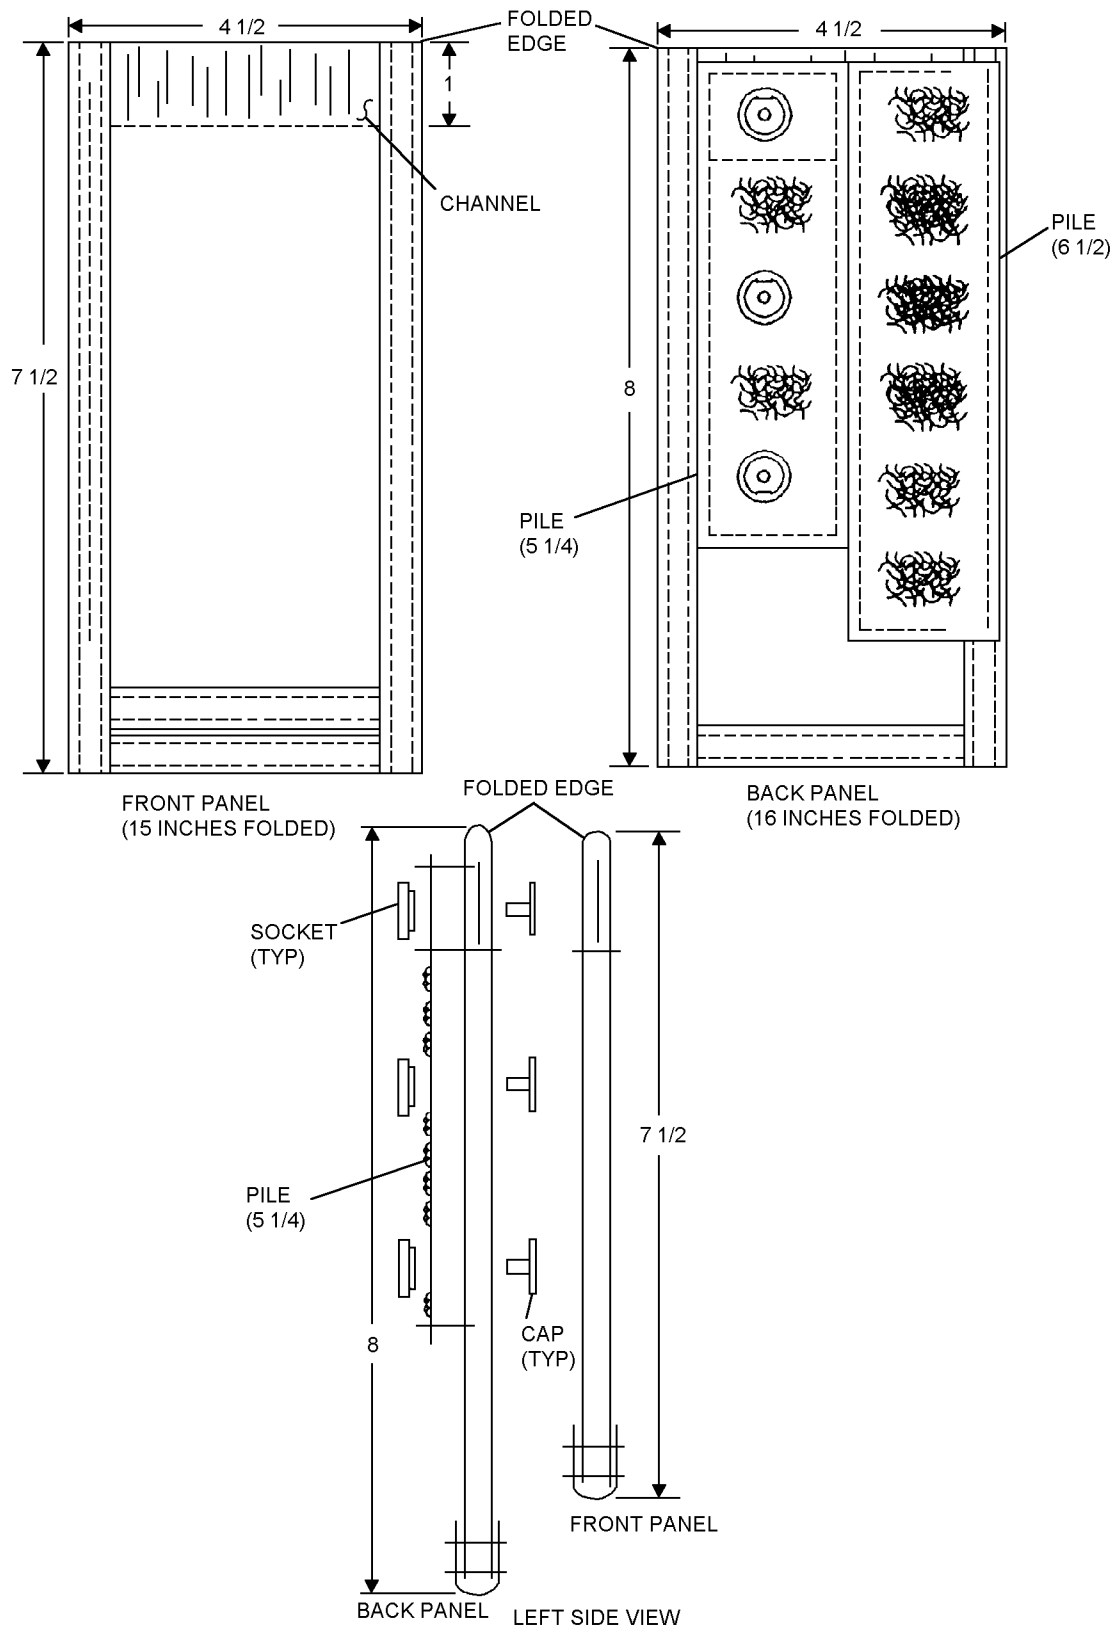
Fabrication of CBR Hose Pocket Assembly
